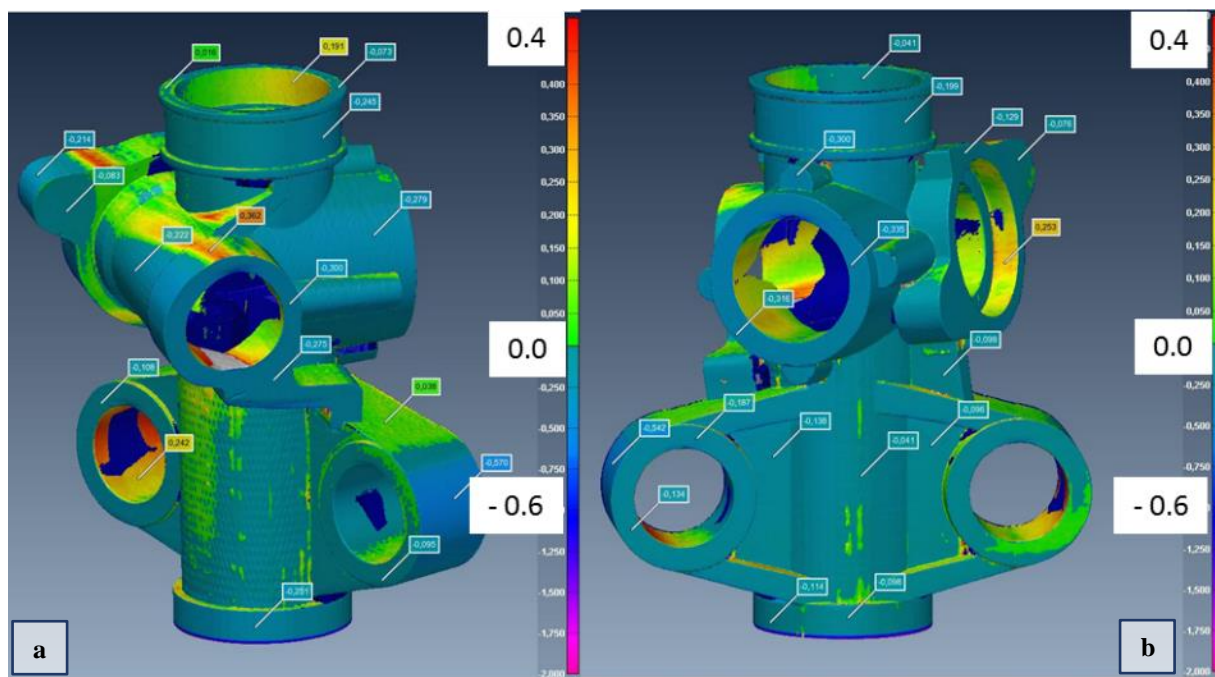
Deviations from the nominal dimensions of the first steering gear housing fabricated using the SLM method; a, b - two different viewing directions
